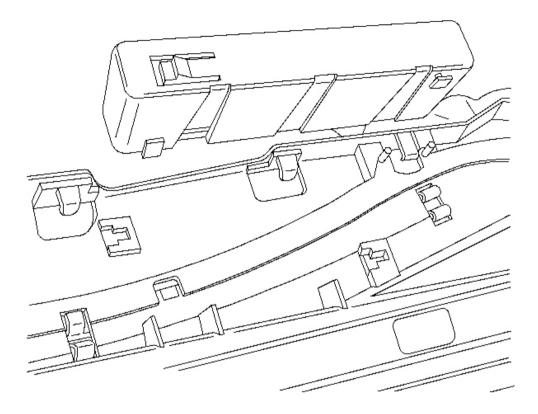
Inserting Control Module Tabs Courtesy of GENERAL MOTORS CORP.
